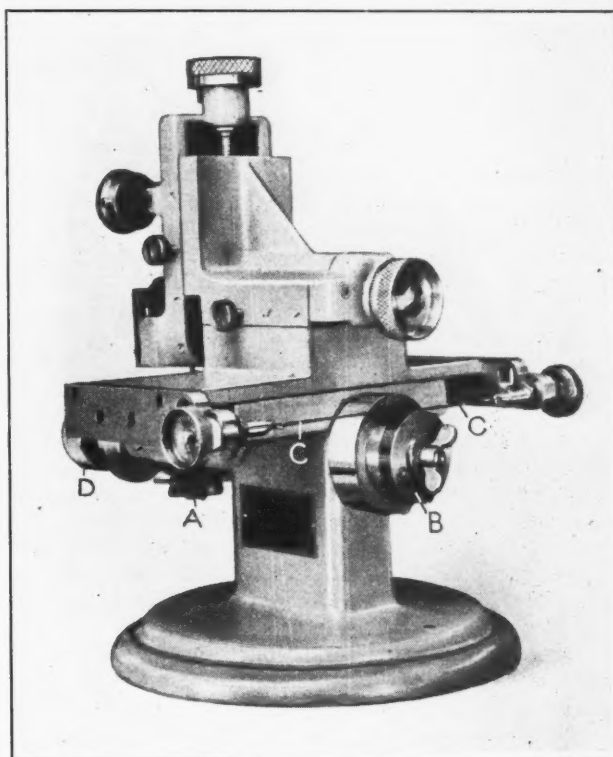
Rear View of Testing Machine, showing the Arrangement of the "Base-circle" Disk and Tapes
